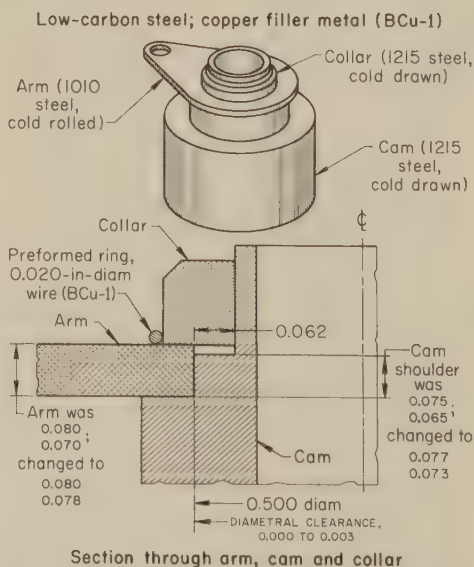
Assembly for which tolerances on arm stock and cam shoulder were tightened to reduce excessive clearance that prevented adequate flow of brazing filler metal (Example 558)
